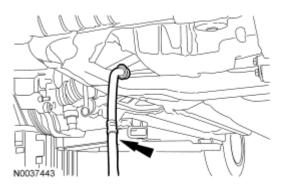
Locating Engine Roll Restrictor Bolt Courtesy of FORD MOTOR CO.
